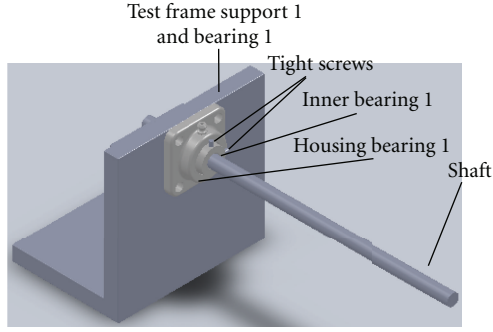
Schematic diagram of cylindrical shaft with mounted ball bearing.
